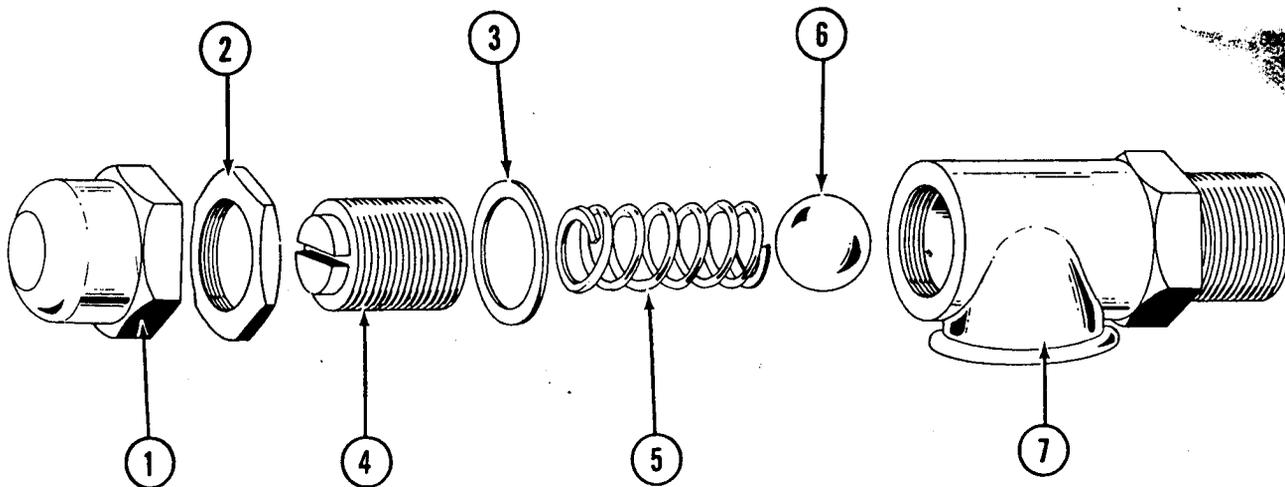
CONVERTER RELIEF VALVE DISASSEMBLY
